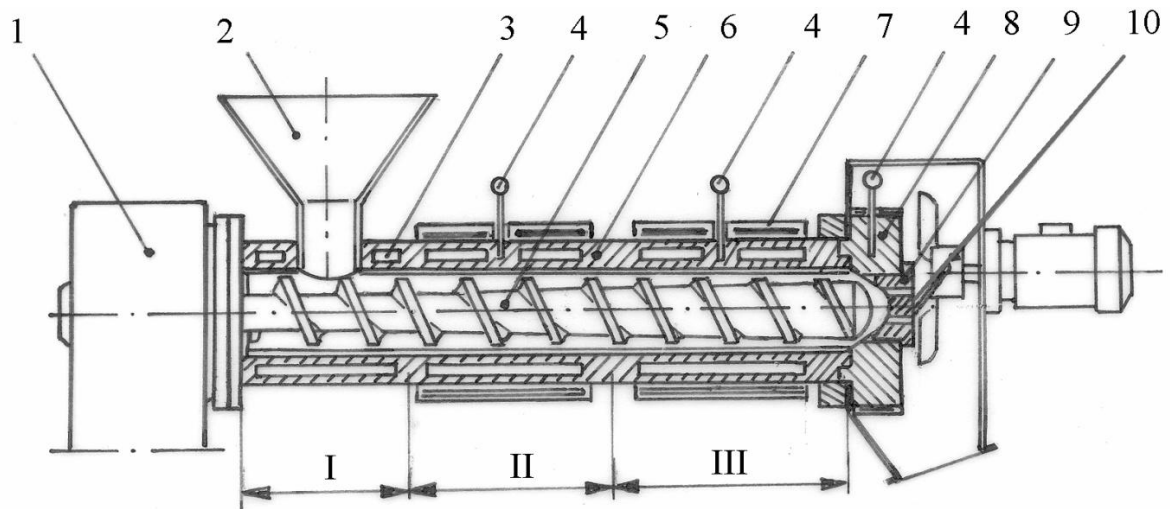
The above is a cross-section of a single-screw extruder showing several parts: 1) Motor, 2) Feeder, 3) Cooling jacket, 4) Thermocouple, 5) Screw, 6) Barrel, 7) Heating jacket, 8) Head, 9) Die, 10) Nose. The sections correspond to I) Transport, II) Melt conveying, III) Melt/Plasticising (Moscicki 2010)
